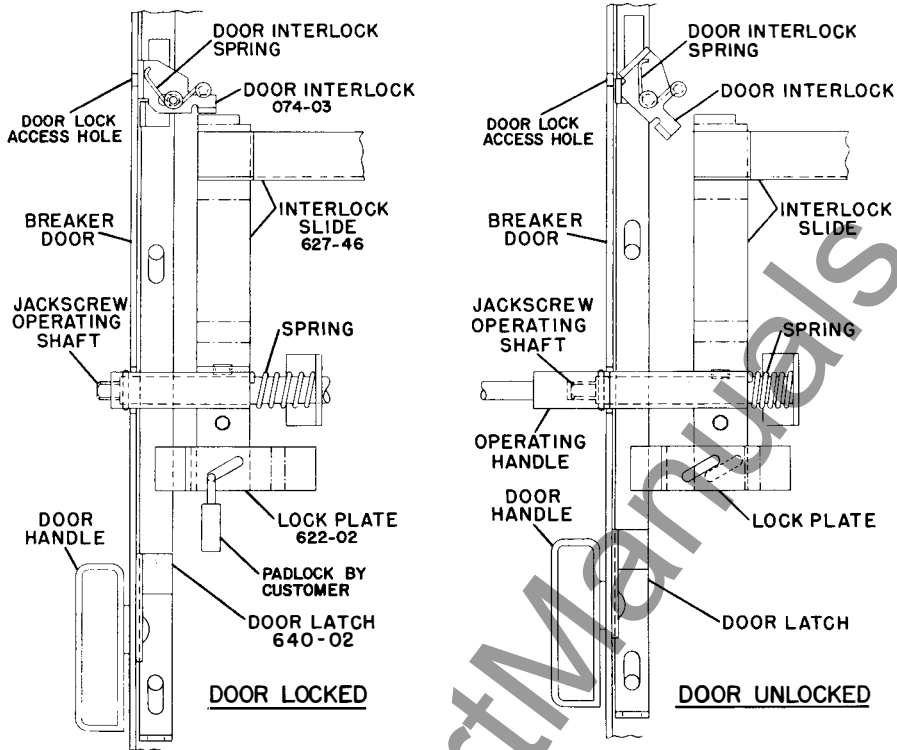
(0121C1509) Door Interlock and Padlock device for AK breakers
